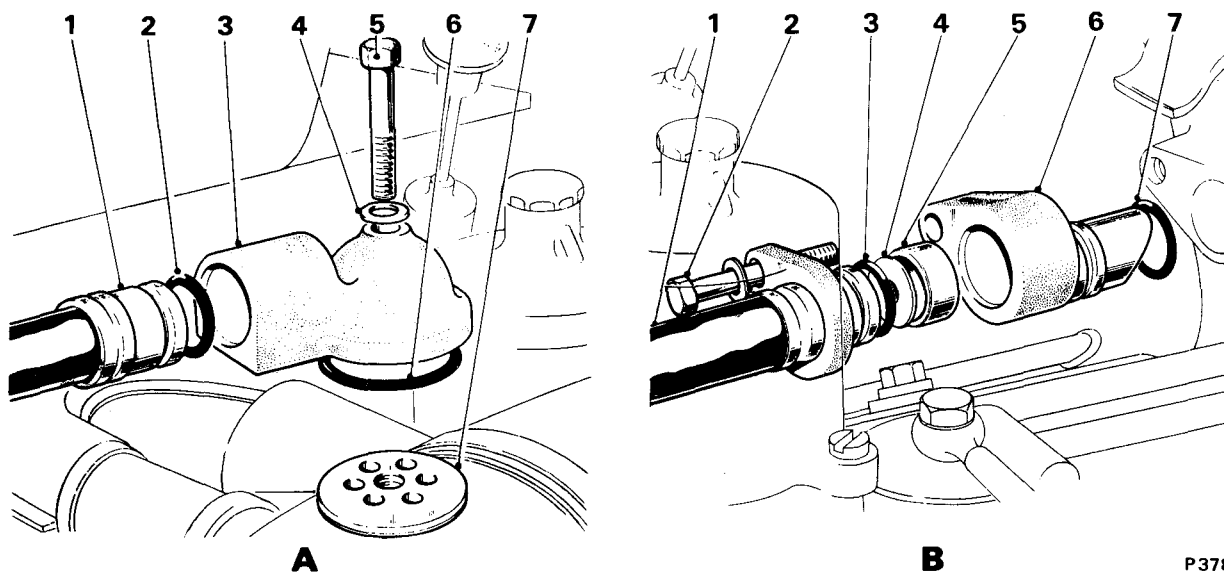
EXPLODED VIEW OF CRANKCASE EMISSION CONTROL PIPE
